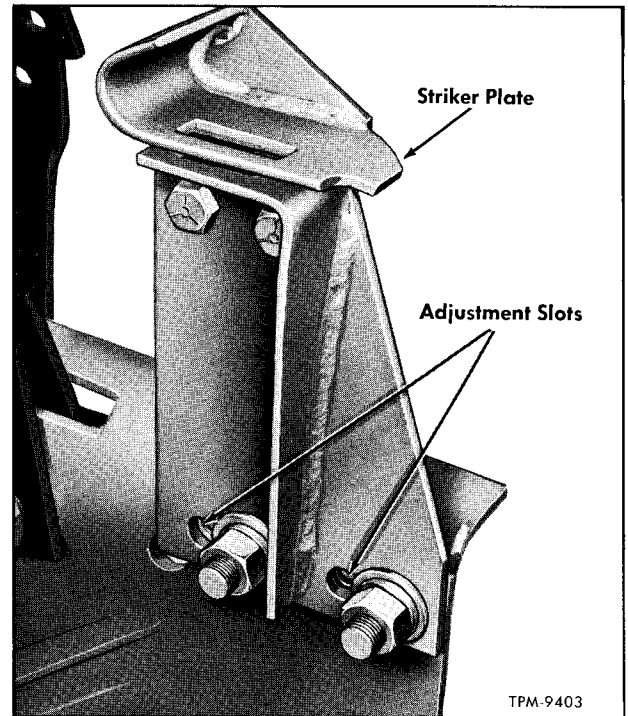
Radiator Latch Adjustable Bracket—8 Cylinder
